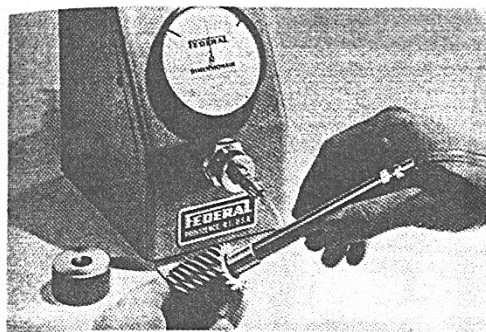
Gaging a hole using a pressure-type air gage.
